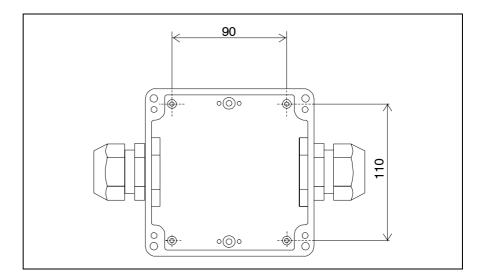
7: Spacing for bore holes on base of air filter housing
